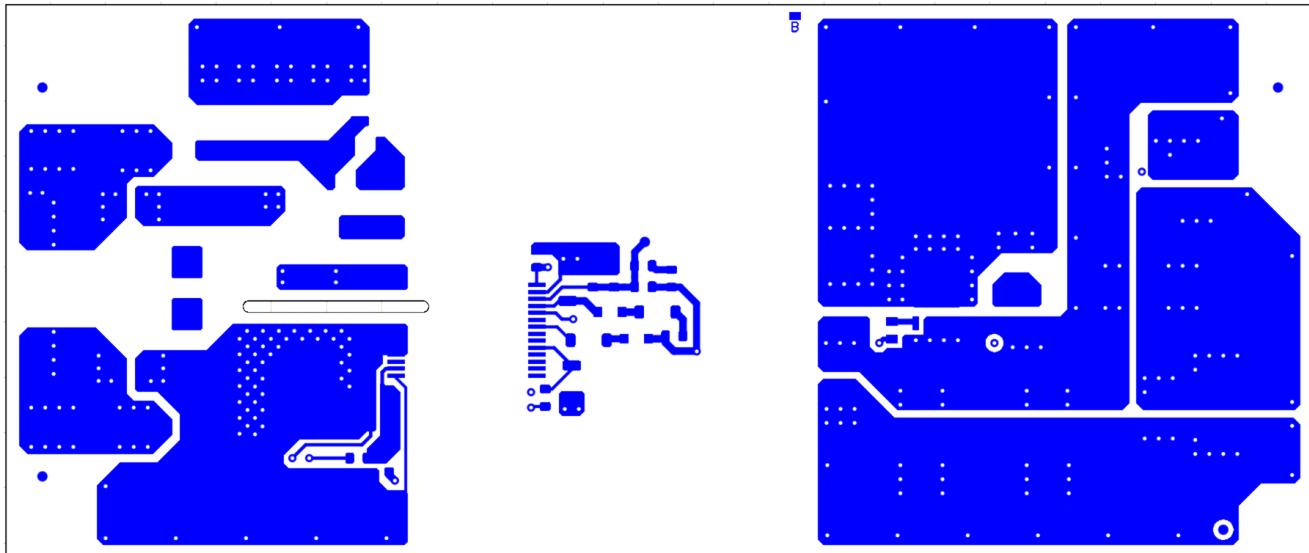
RDR-994Q Bottom Layer PCB Layout.
